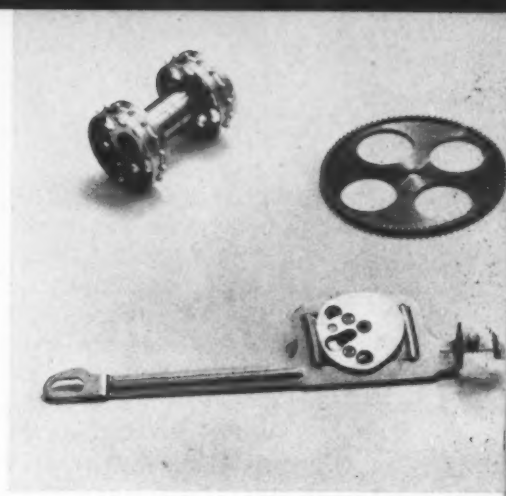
Left—Machining was considerably simplified on part which employs improved stainless steel. Fig. 2—Right—Extremely close tolerances were maintained on this sprocket wheel made of corrosion resisting material
